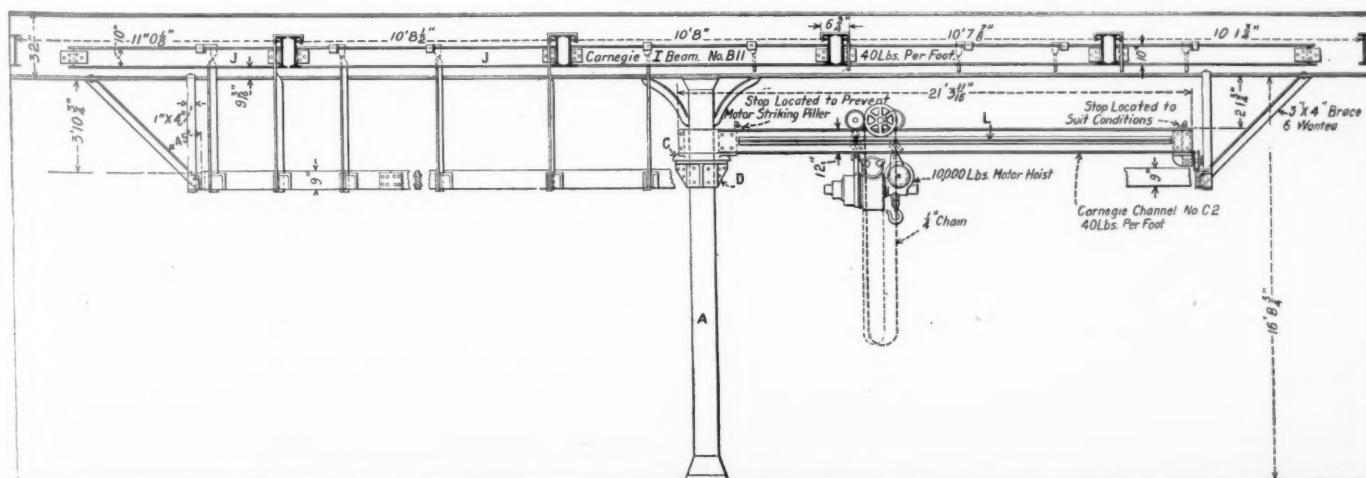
Elevation Showing Column and Arrangement of Jib Crane with Motor Hoist
